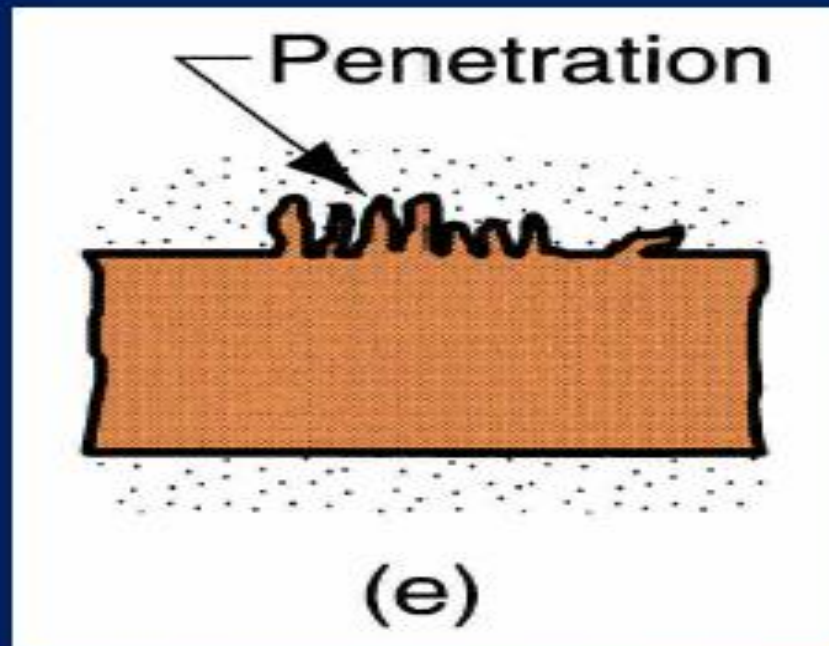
Common defects in sand castings: (e) penetration
